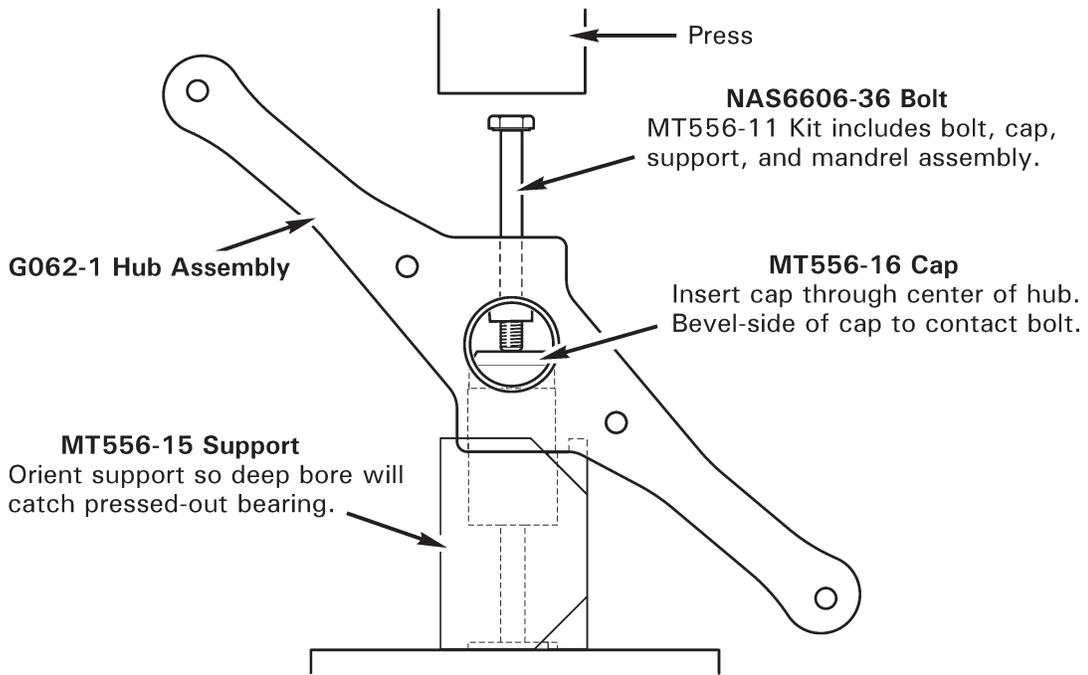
ELASTOMERIC BEARING REMOVAL
